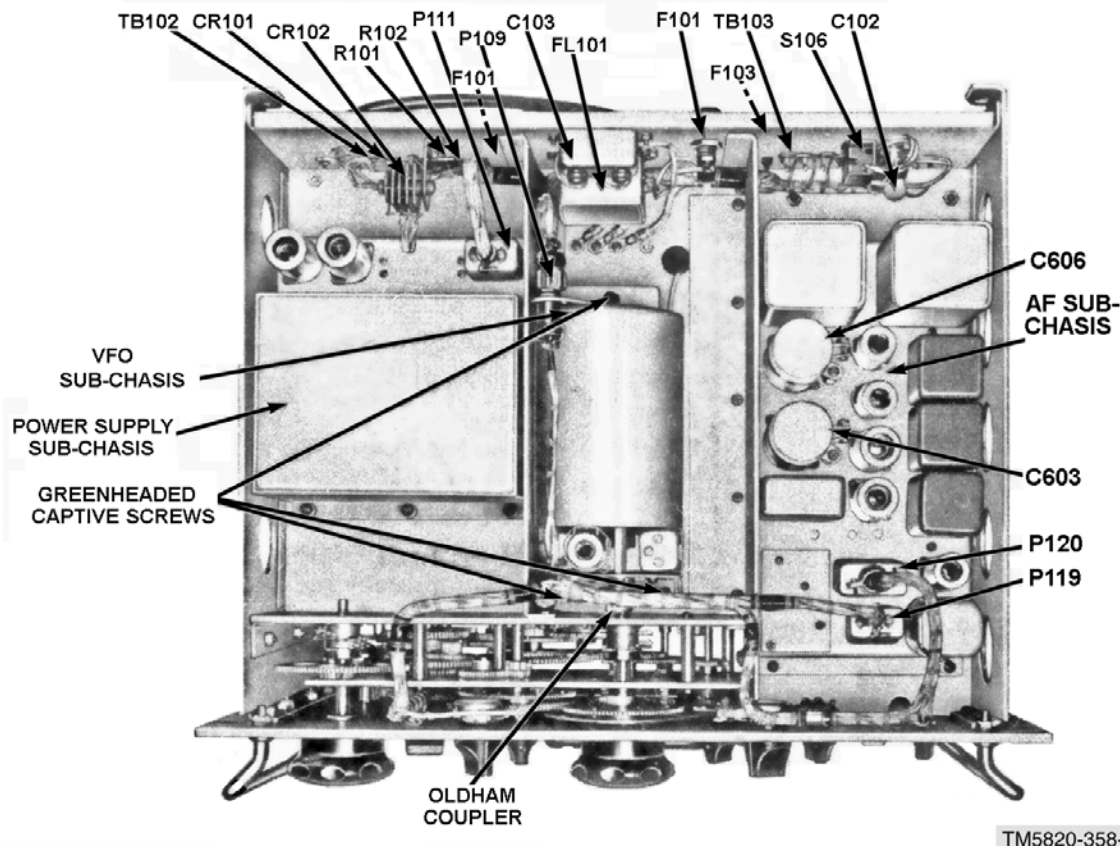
Radio Receiver R-390A/URR, Bottom View -Norris
